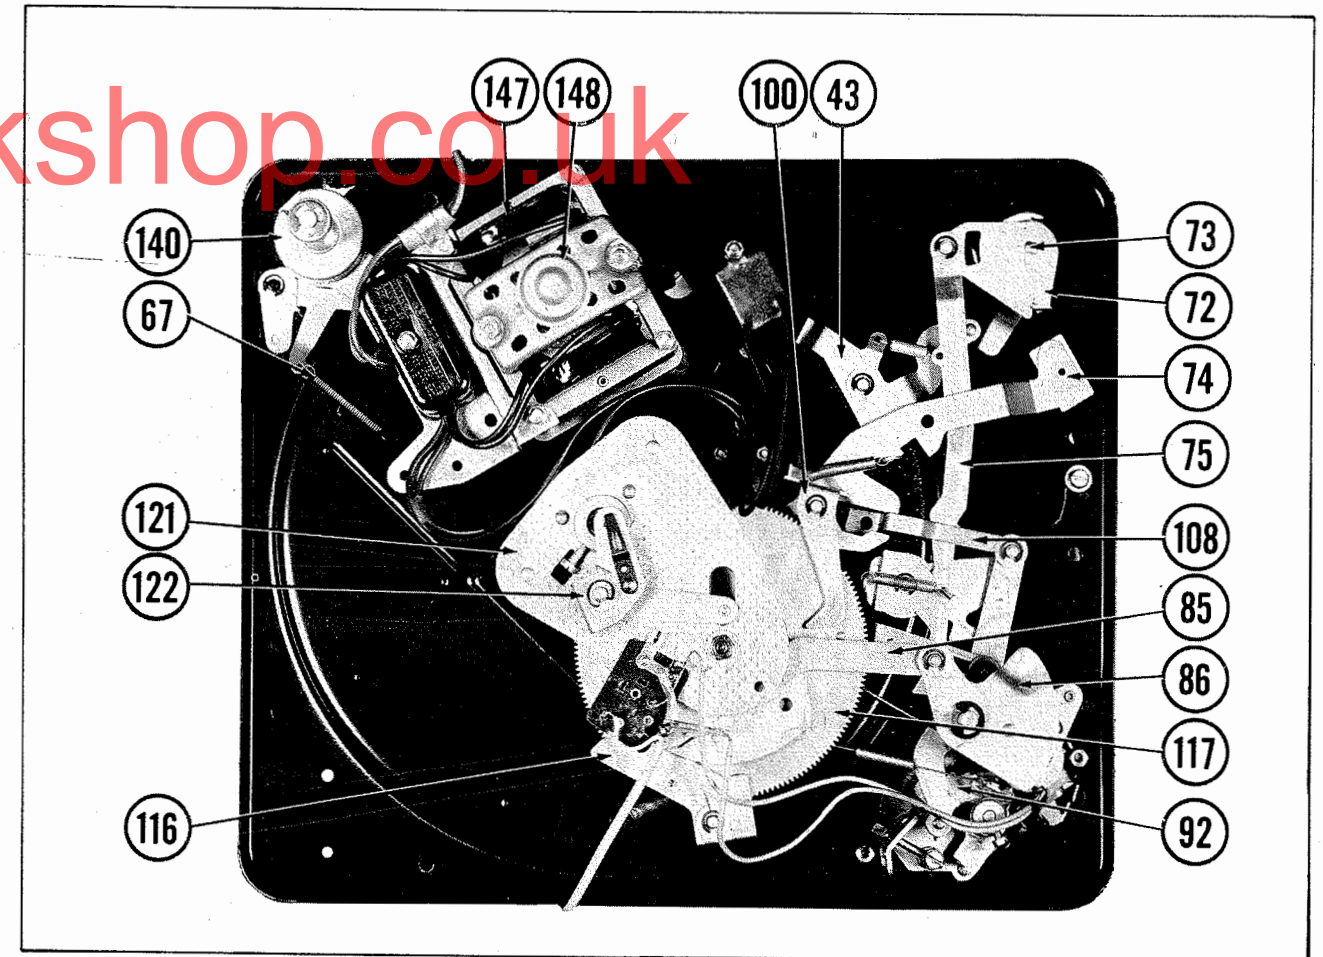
BOTTOM VIEW OF CHANGER MECHANISM
